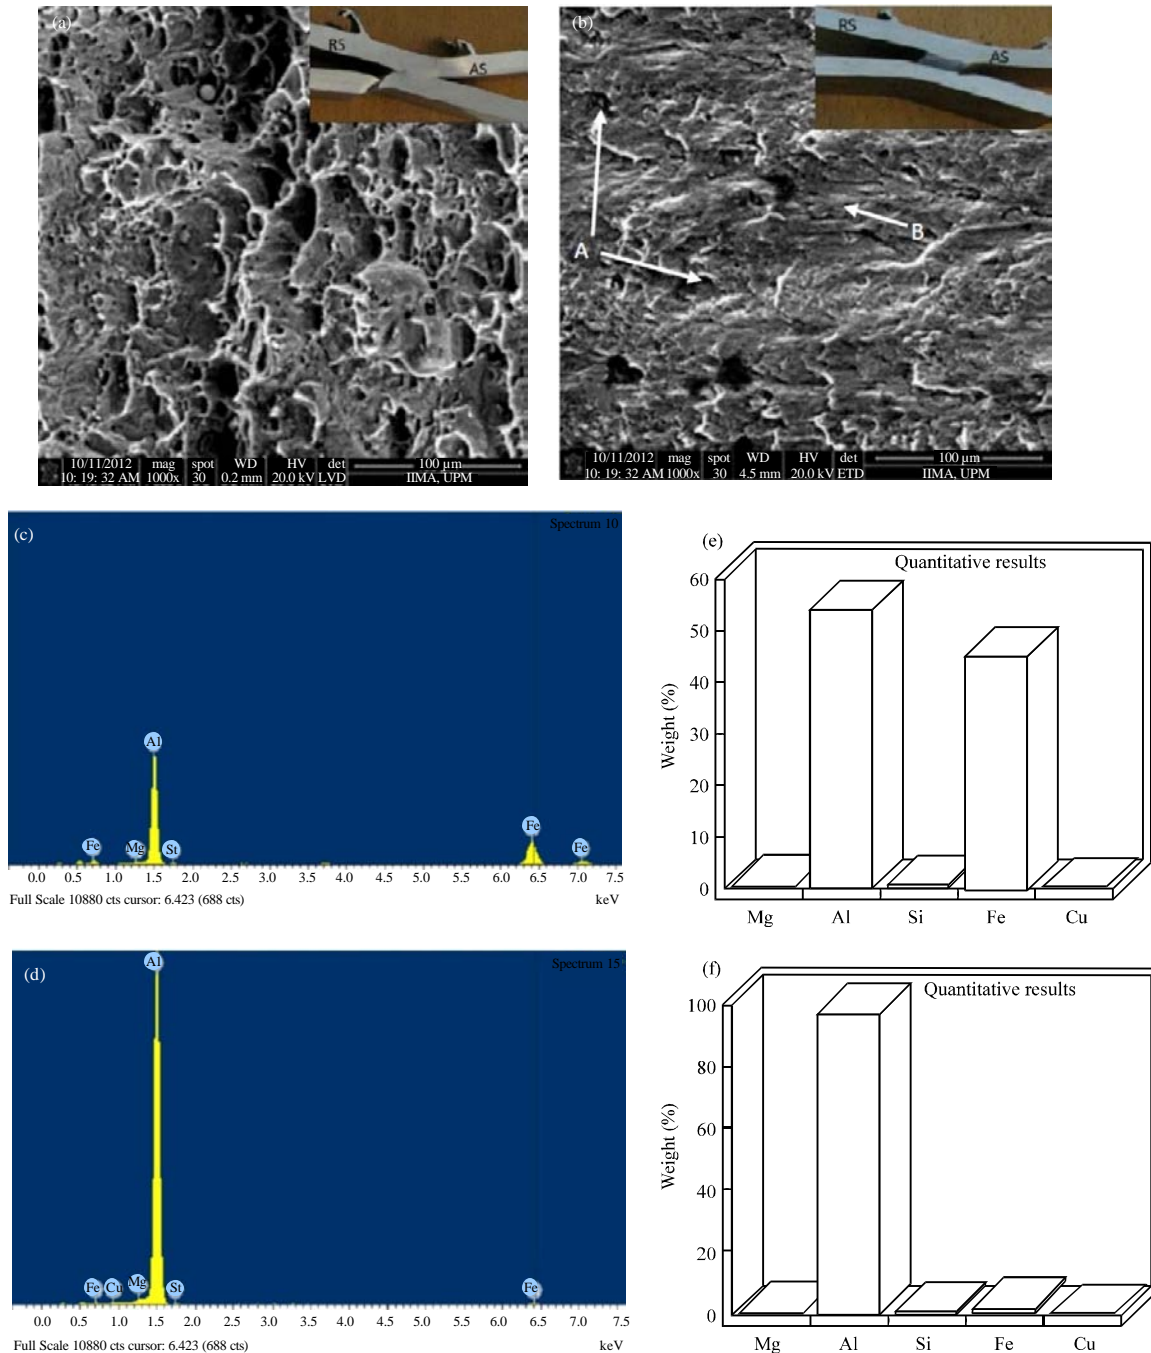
(a-f): Fracture surface of the overlap shear test samples, (a) 40 mm min<sup>-1</sup> welding speed-fracture from thinning to the bottom plate and (b) 50 mm min<sup>-1</sup> welding speed-fracture through nugget zone, (c) EDX spectrum of point A, (d) EDX spectrum of point B, (e) Quantitative results of point A and (f) Quantitative results of point B
